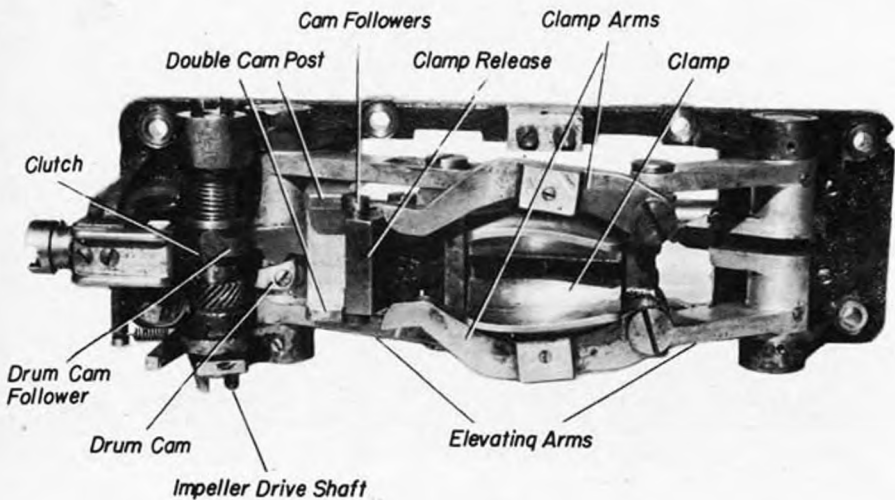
Hydroplane Elevating and Releasing Assembly, Top View
